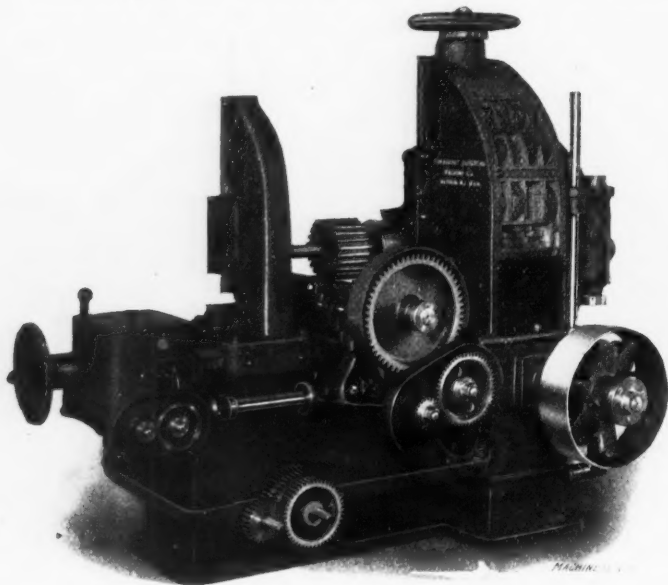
A Machine made by Eberhardt Bros., with Special Shortened Column; of Rugged Design for cutting Coarse Pitch Pinions.
